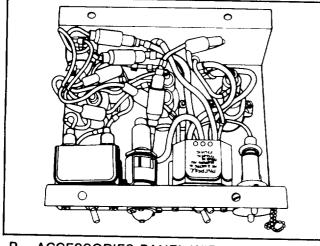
Location of major components, assemblies and auxiliaries (Sheet 2 of 7).
